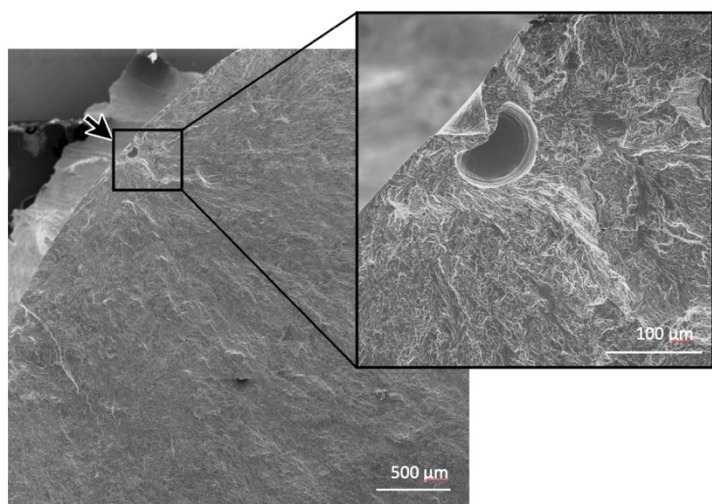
Fractography of the HIP+Machined samples, with the arrows indicate the location of crack initiation.
